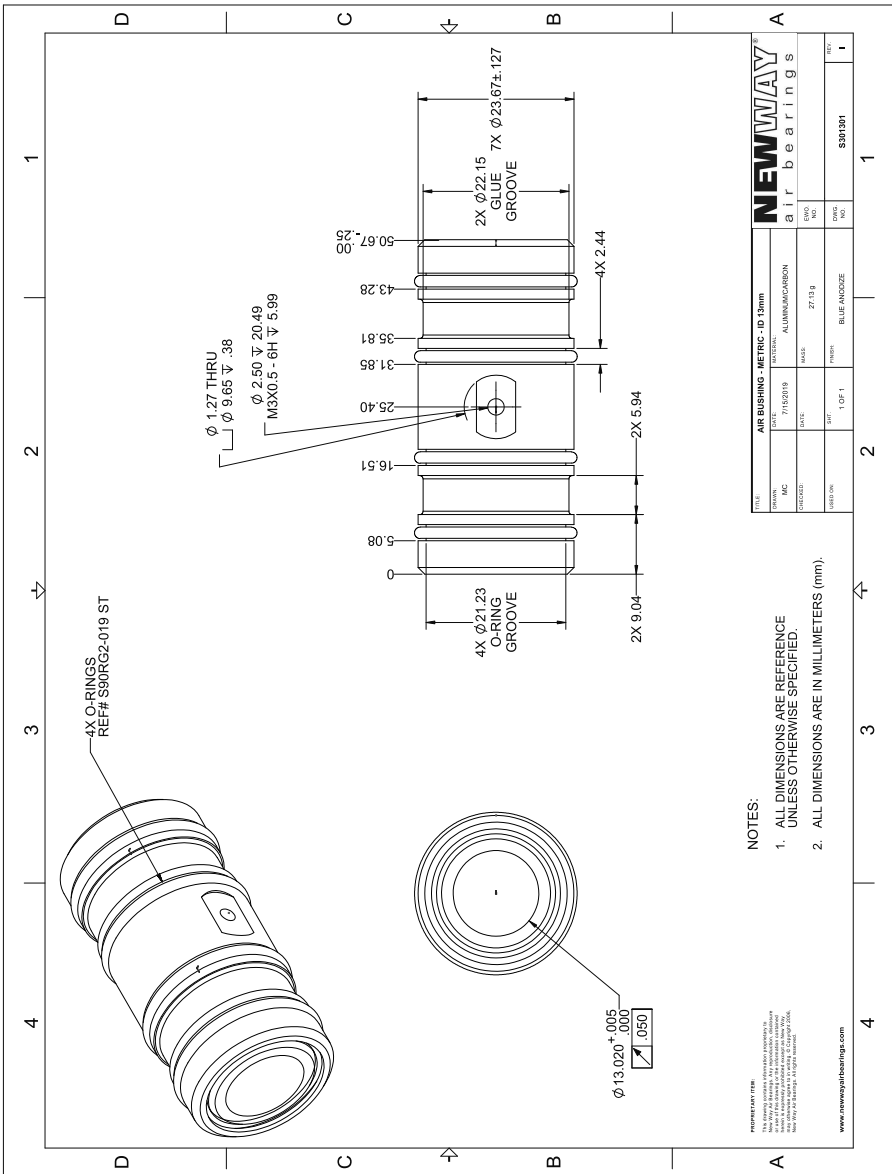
Technical drawings of axial air bearing, type S301301 from NEWWAY air bearings [143]
